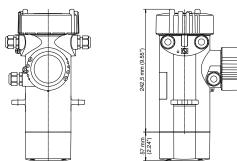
Aluminium housing or stainless steel housing - Precision casting
